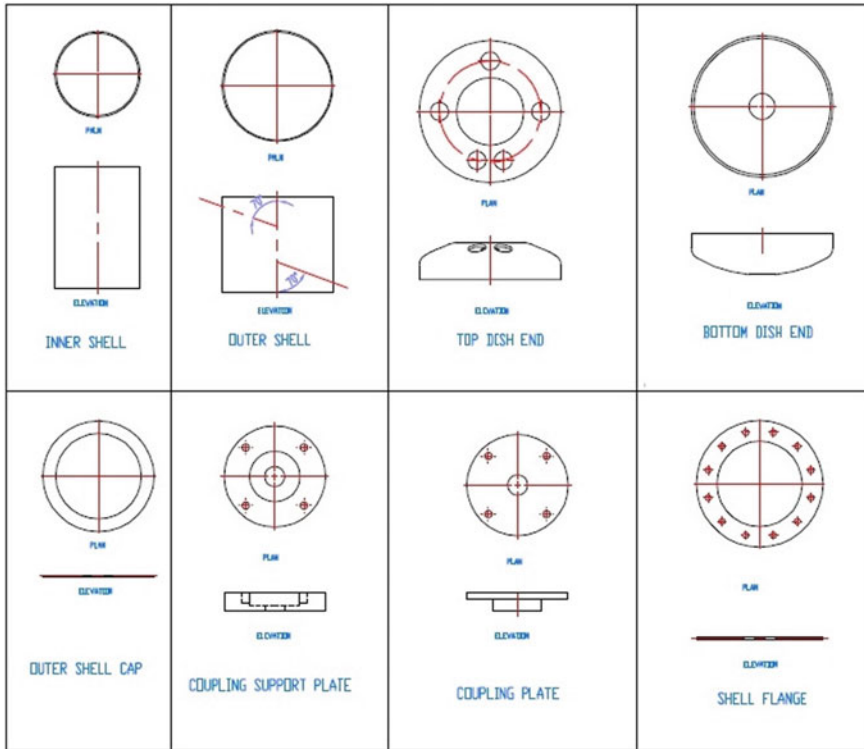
Technical drawings-2 of each part with the assembly of batch reactor of laboratory scale
